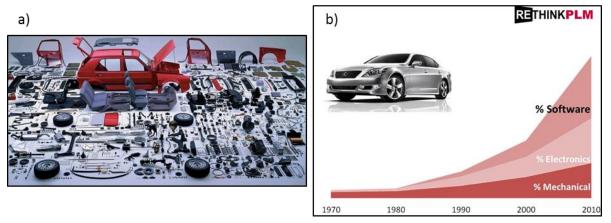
a) Exploded view of the 1983 Volkswagen Golf MK2 [22] and b) the exponential increase in parts since the 1970's [23]
